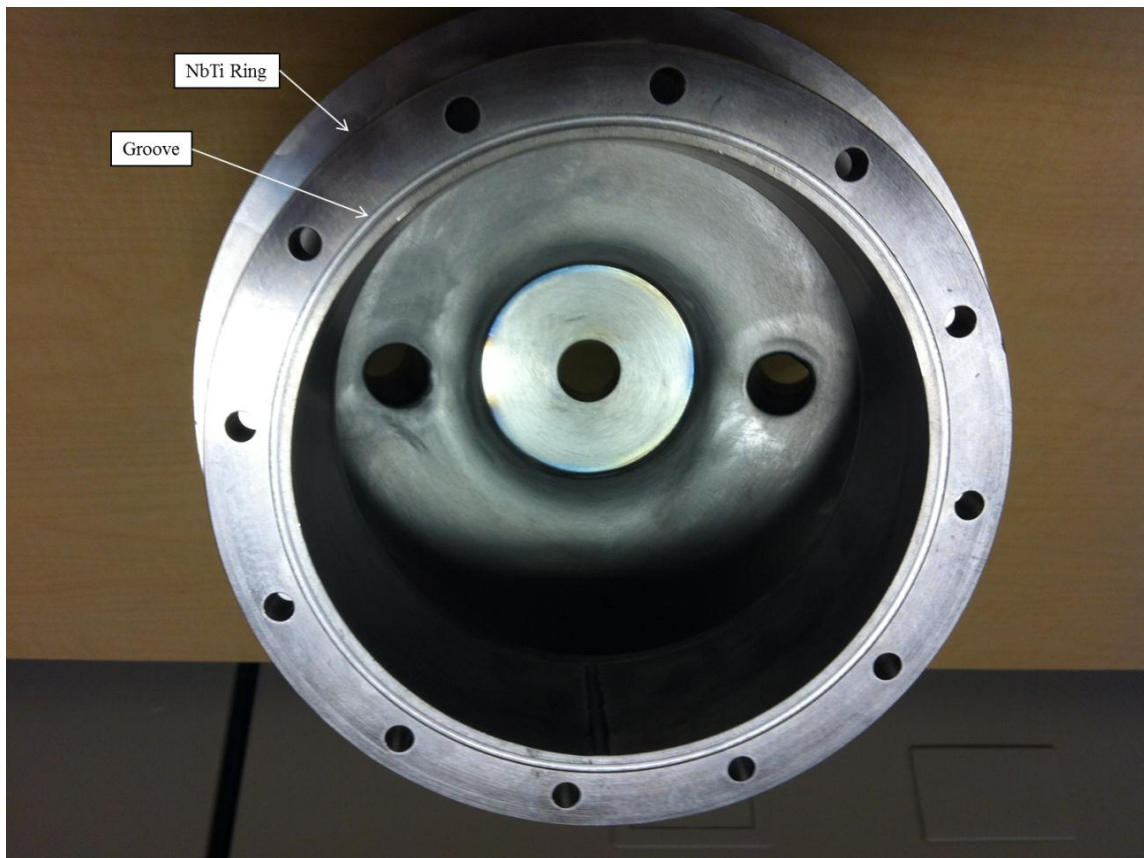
Schematic Showing the Indium Wire Groove and NbTi Base Plate Ring
